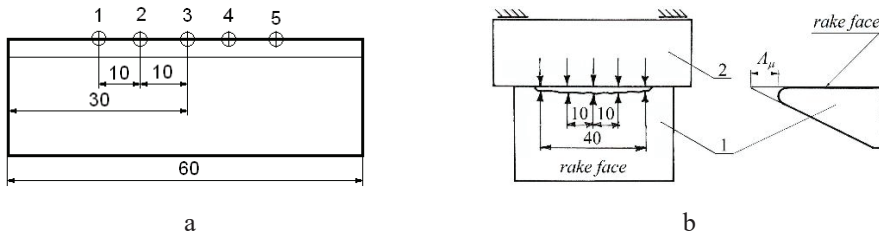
Measurement schemes of the cutting edge microgeometry parameters: a: the scheme of the cutting edge rounding radius ρ ; b: the scheme of the cutting edge recession A_μ ; 1: the milling tool; 2: a plate
